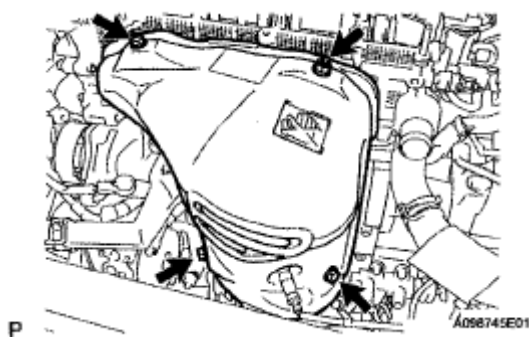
Locating Exhaust Manifold Heat Insulator With Bolts And Nut
